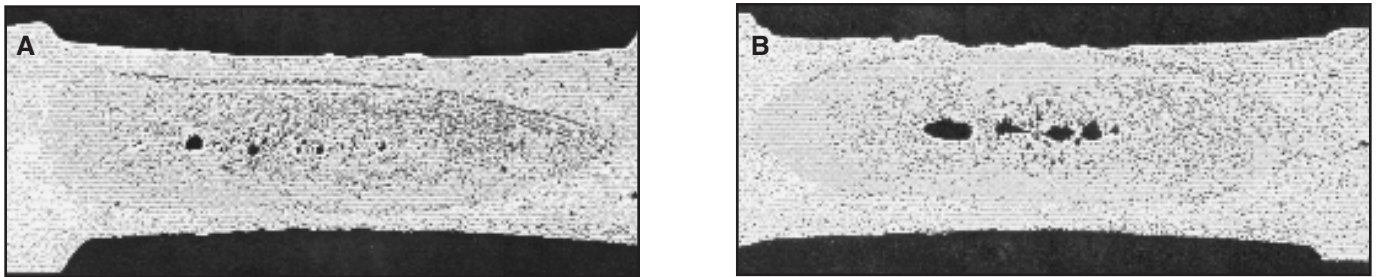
Weld cross sections with different friction (2-mm aluminum). A — Without additional friction; B — with additional friction.
